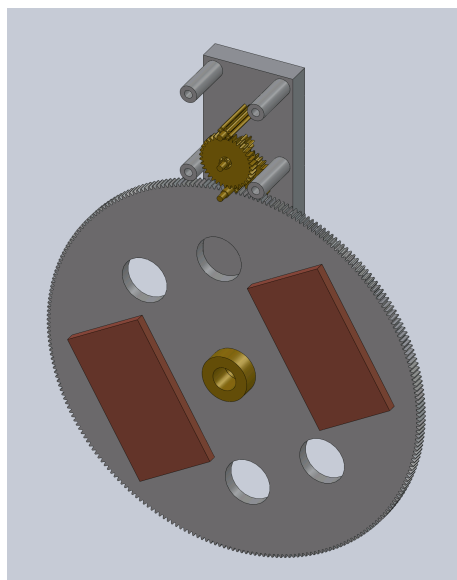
A CAD rendering of the second-phase prototype with a custom-built gearbox driven by a $\varnothing 3.2$ mm DC motor. The gearbox top plate and wheel shield are not shown.
